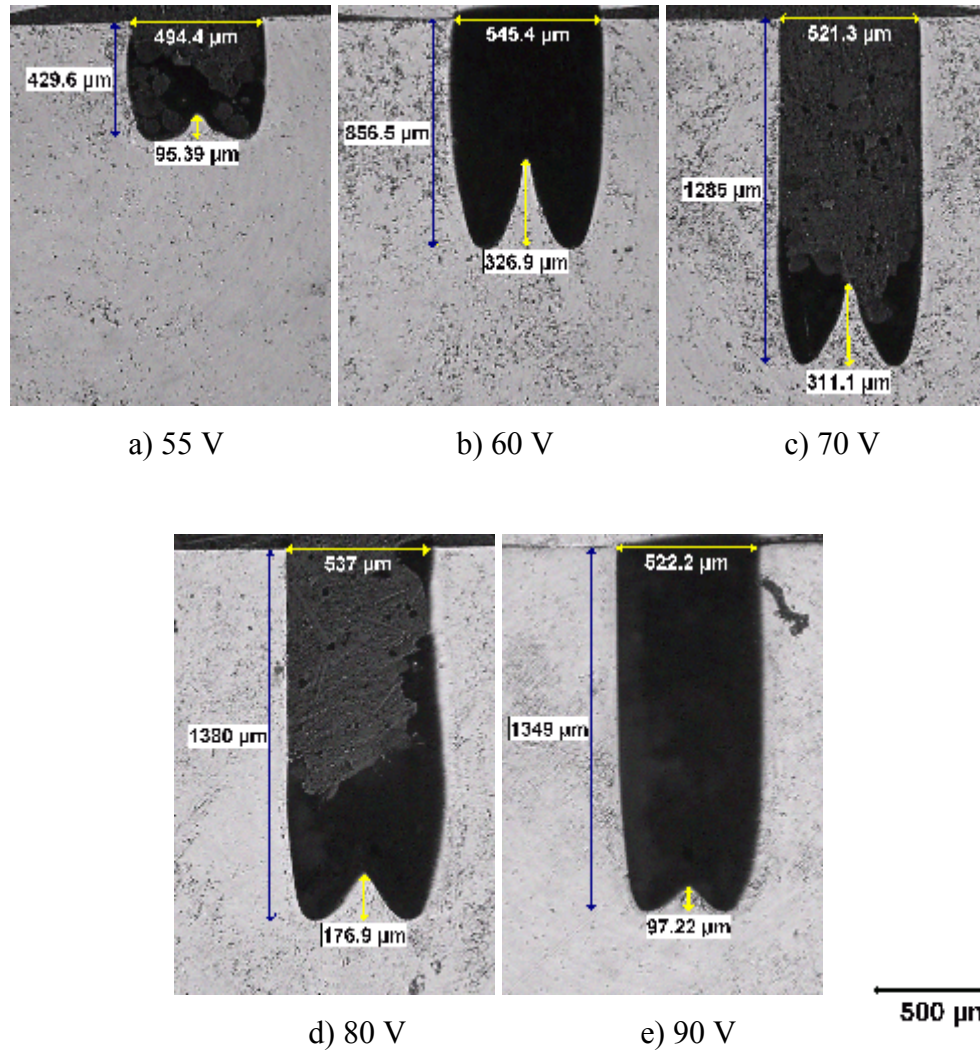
Cross-sectional views of machined holes by using varying open voltages
